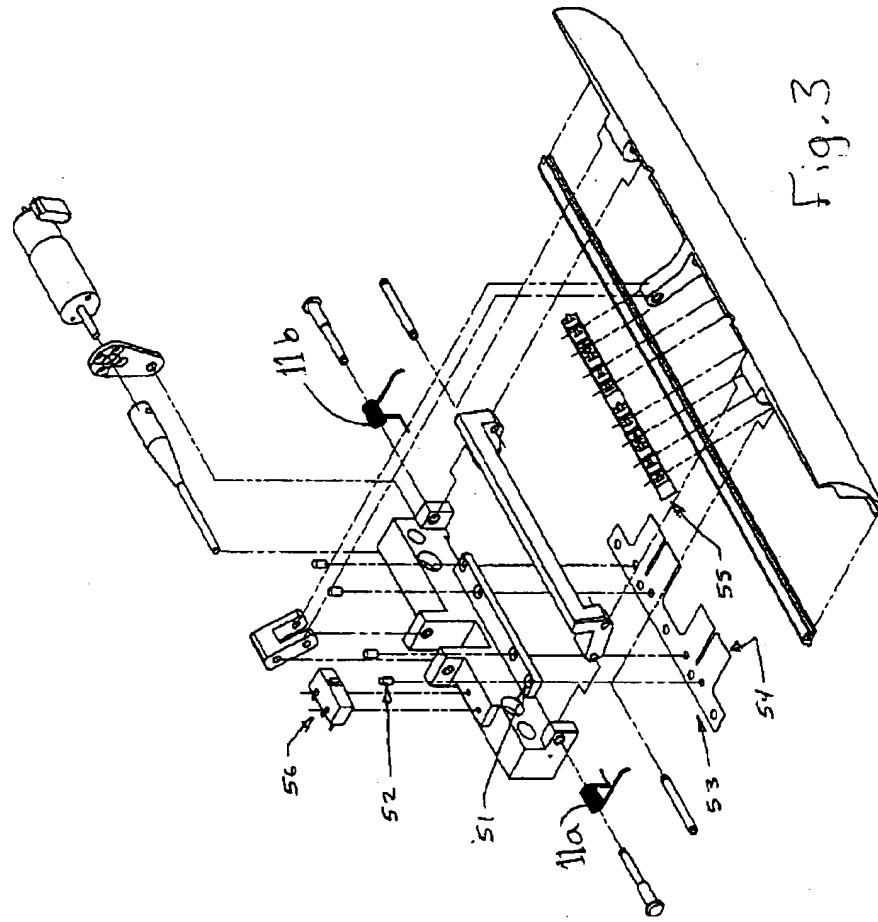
is an exploded view of the eyelid assembly according to the present invention; and
